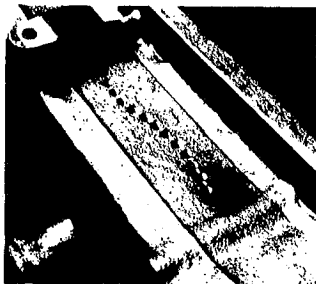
Series of holes precision drilled and tapped along crack line for threaded pins.
